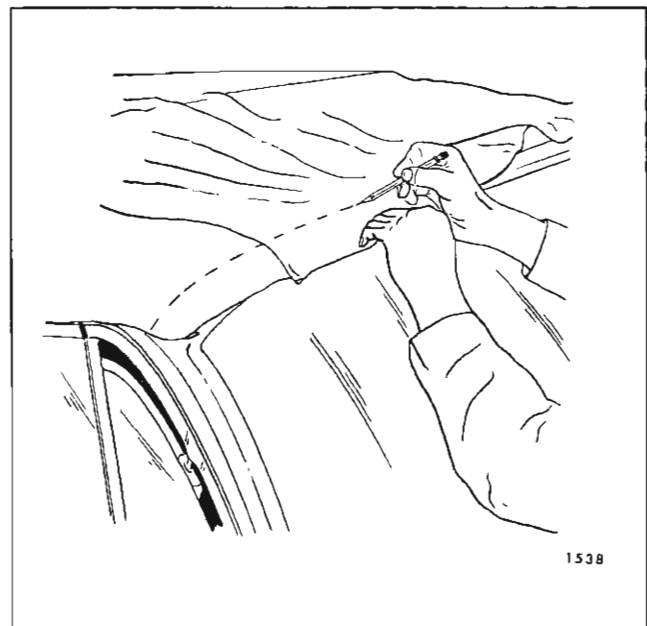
I-23 — Marking Top Material At Front Roof Rail
